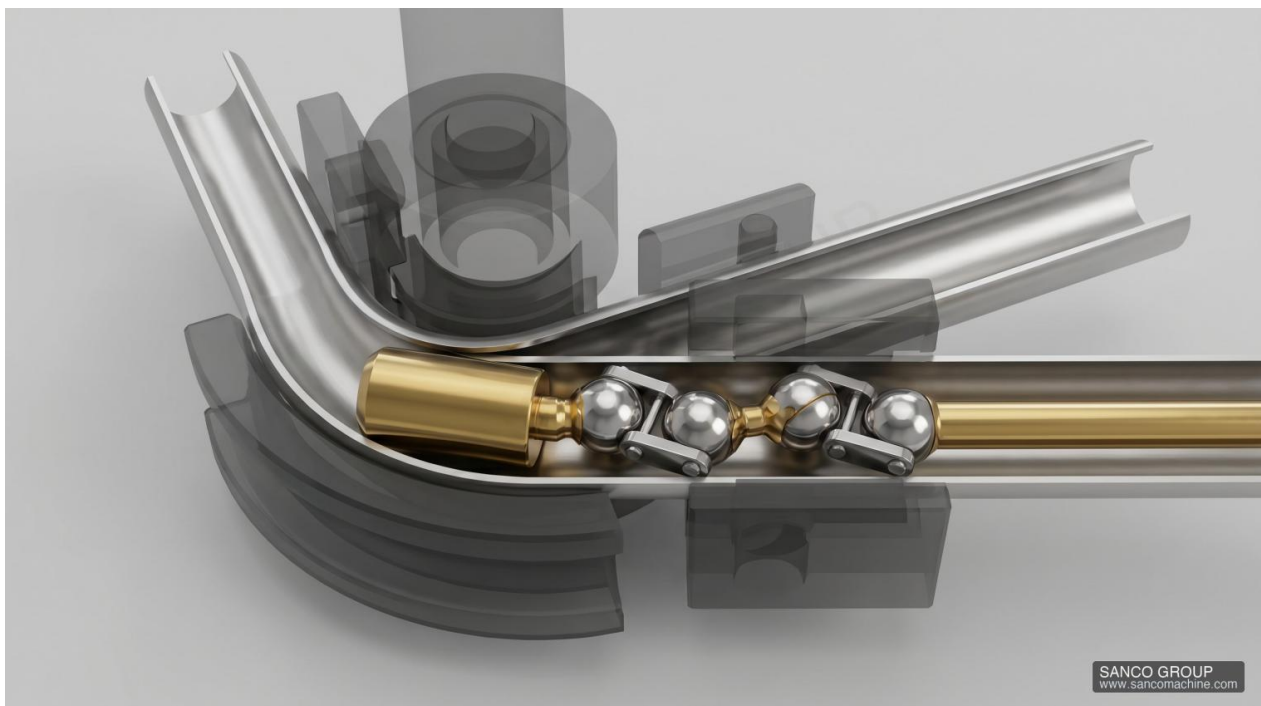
Schematic Diagram of Multi-ball Mandrel (Multi-ball Mandrel) Working Inside a Thin-walled Pipe (Pipe Body Section Shows Internal Structure) — © SANCO GROUP · www.sancomachine.com
